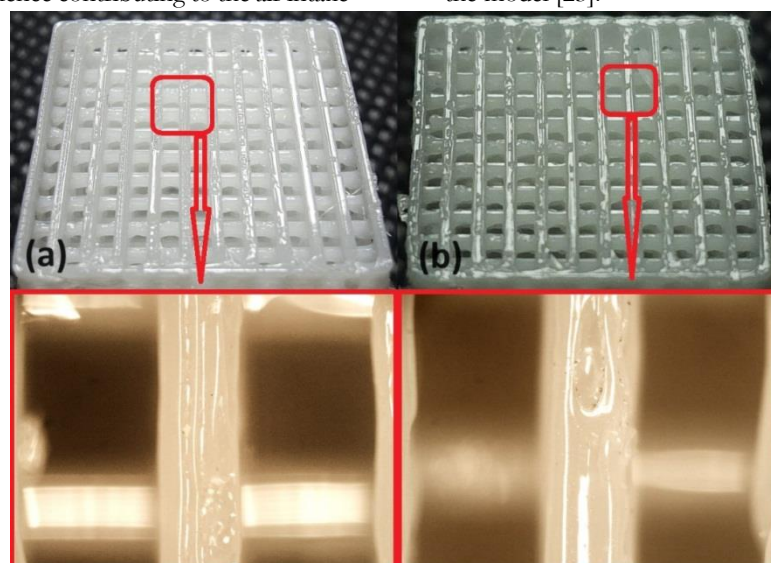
Illustration the top view texture of the printed specimens with (a) 210 °C (b) 230 °C.
